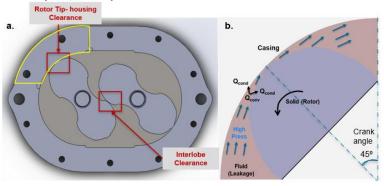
(a) Section view of Roots Blower clearances (b) Fluid flow in clearance Roots Blower.
